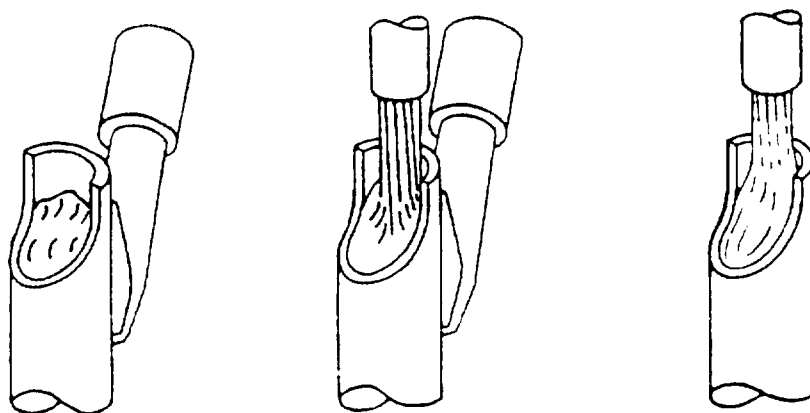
Soldering of hollow cylindrical connectors (see 5.5.8).
